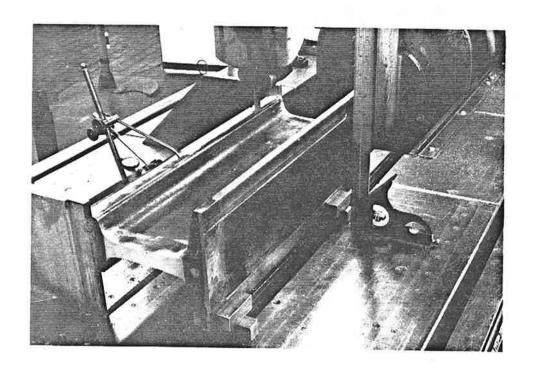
INITIAL RAIL HEAD REMOVAL AS PART OF MEIER ROD SLICING
